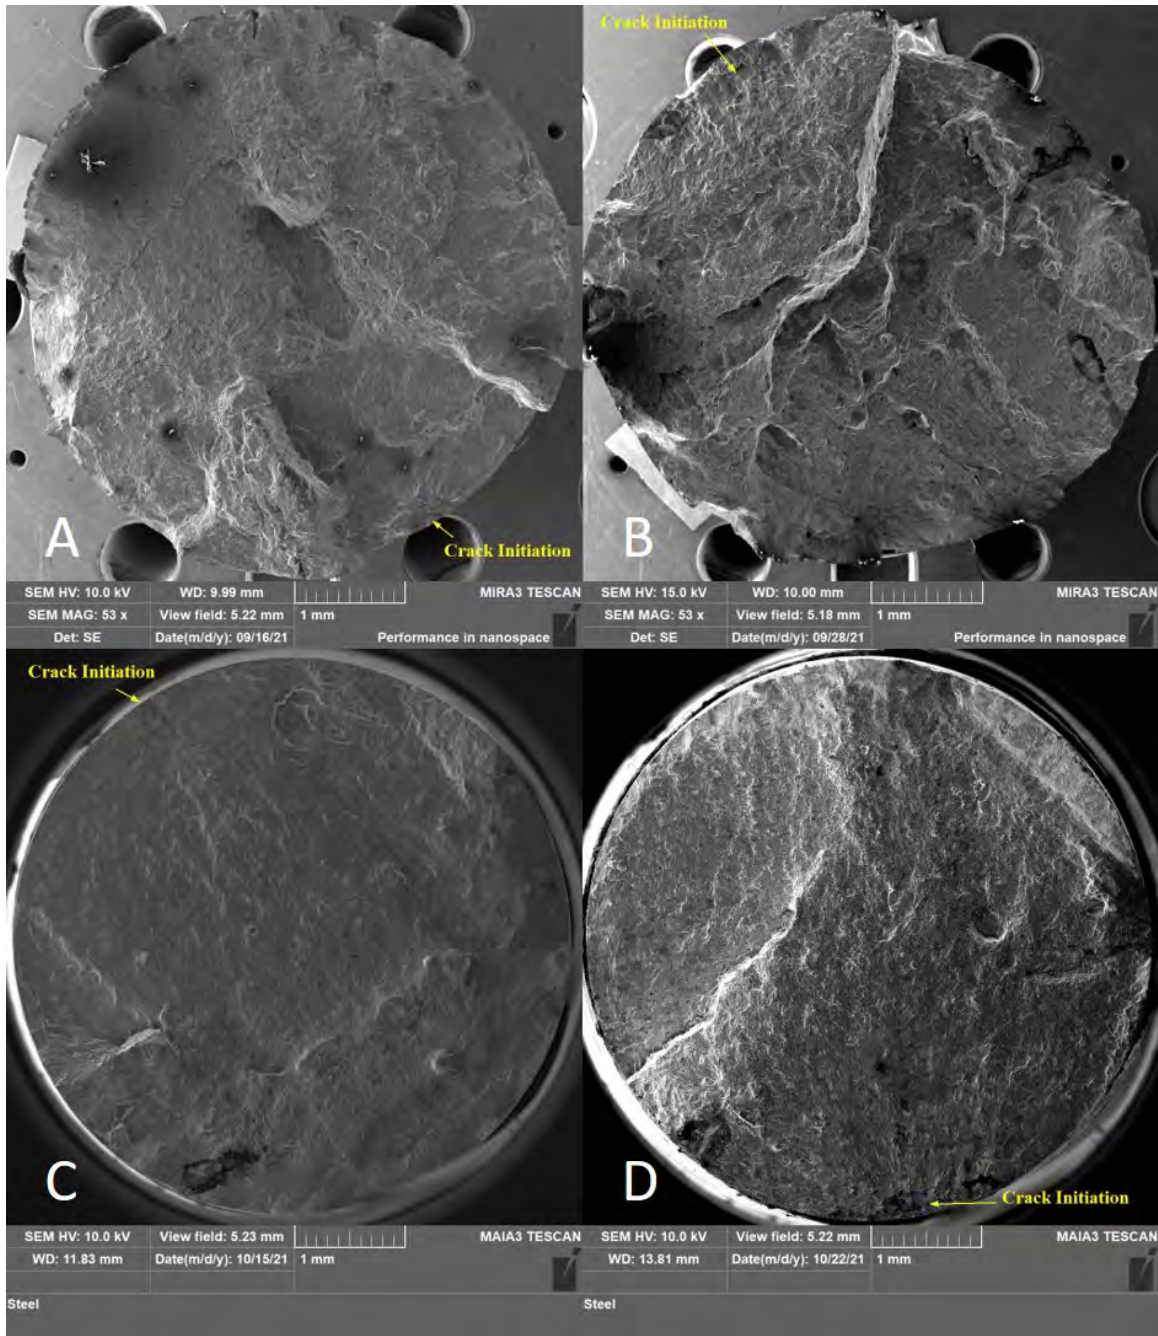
Fatigue bar fracture surfaces with multiple crack initiation points. Identified initiation points belong to the dominate crack growth region for each specimen. A) Fatigue Bar 02: contains four different crack growth regions. B) Fatigue Bar 05: contains two different crack growth regions. C) Fatigue Bar 07: contains two different crack growth regions. D) Fatigue Bar 13: contains two different crack growth regions.
